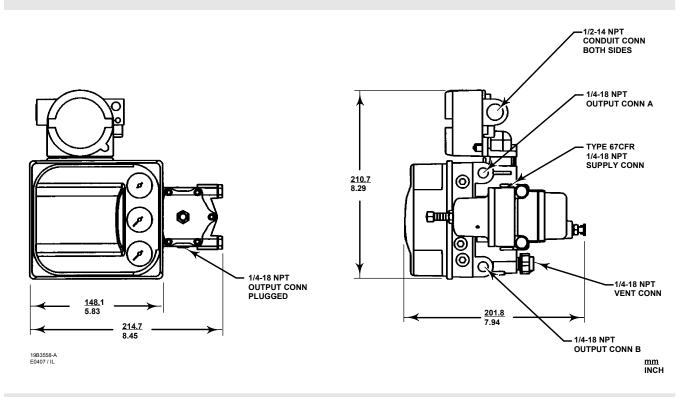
Dimensions for Type DVC6030 Digital Valve Controller with Integrally Mounted Filter Regulator
